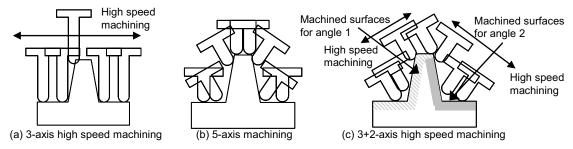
3-axis high speed machining, 5-axis machining, 3+2-axis high speed machining.
